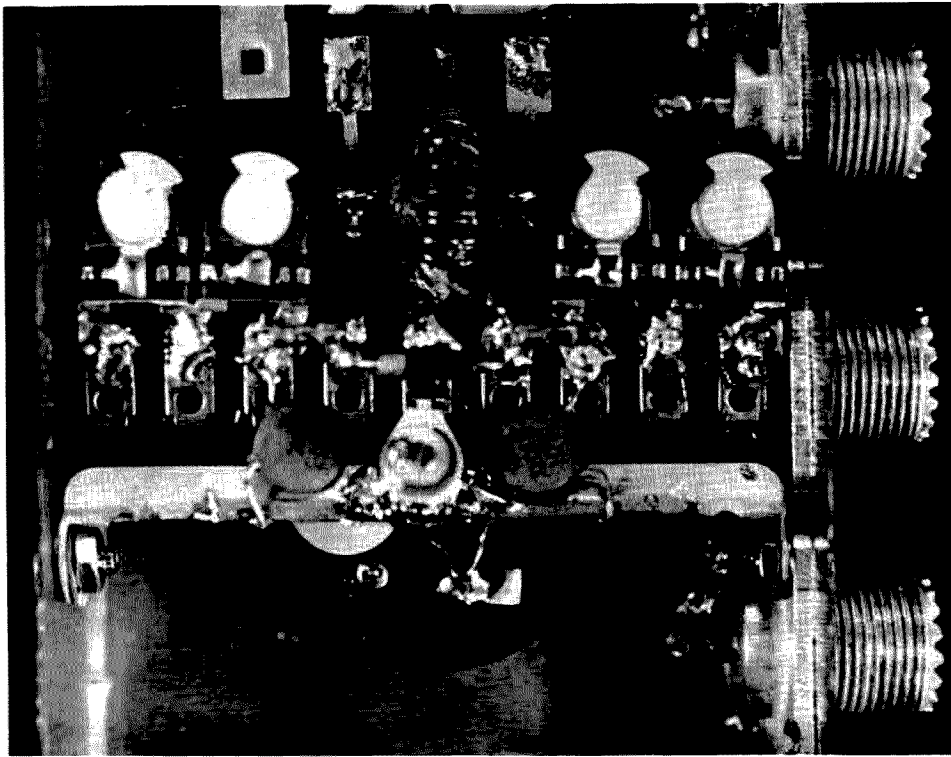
Photo C. A closeup view of nine-lug terminal strip and current transformer. The input SO-239 connector is on the lower right.
